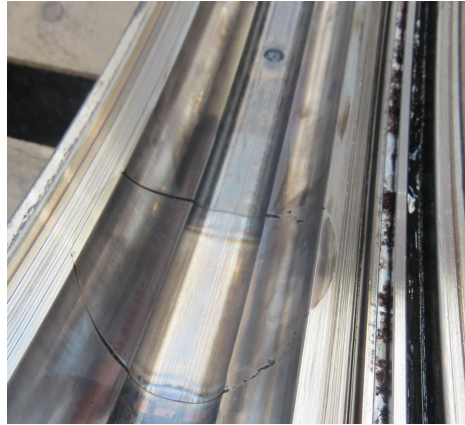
Overheating blade bearing outer ring surface [54].
